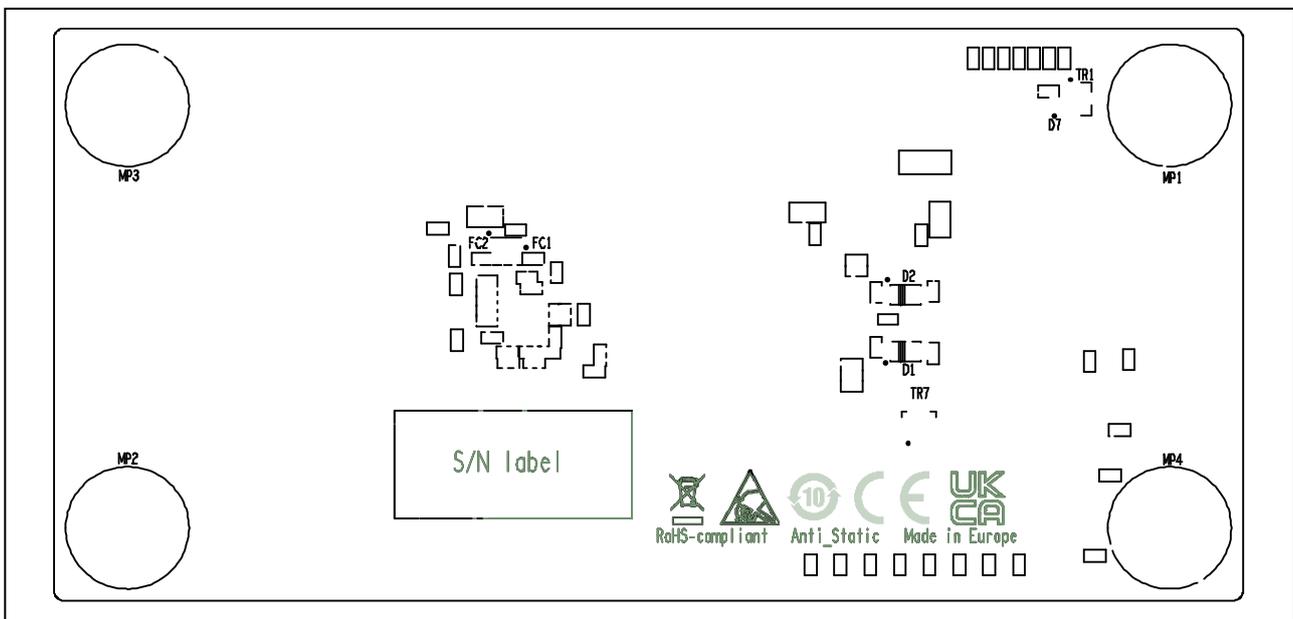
Placement of components on the bottom side of the target board for board version D020090_06_V02
